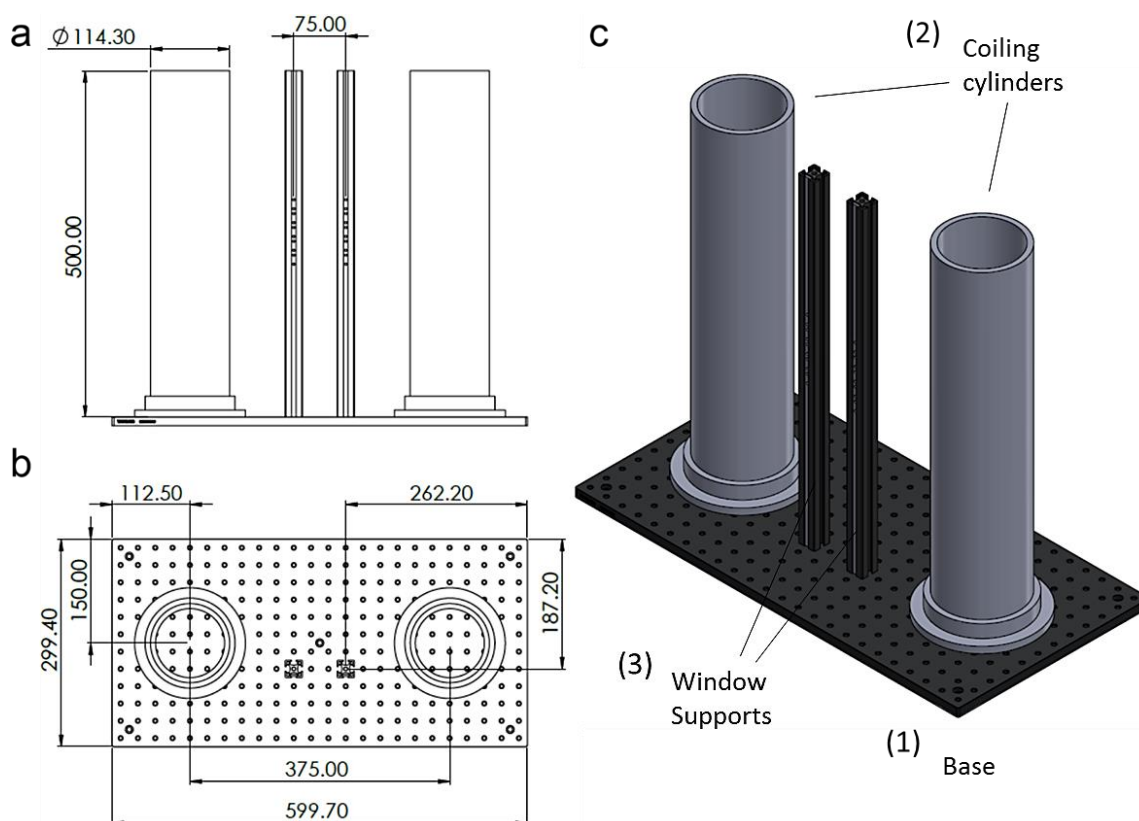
CAD design of the KRAIC-D. (a) Front view. (b) Top view. (c) Isometric view showing the base, coiling cylinders, and central window support rails. All dimensions in mm.
